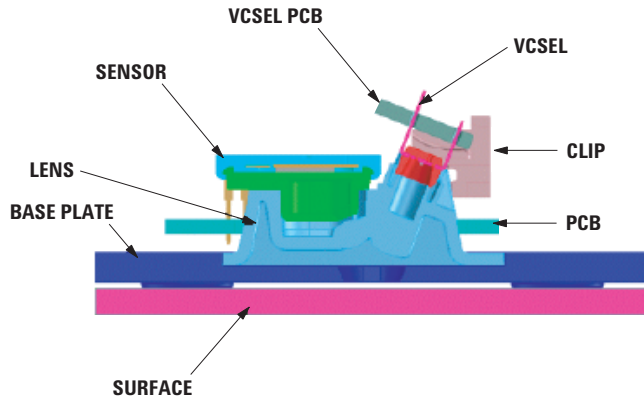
Sectional view of PCB assembly highlighting optical mouse components.
